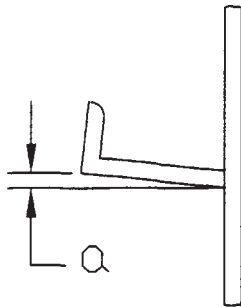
Improper Distance Between Butt Weld and Fillet Weld
